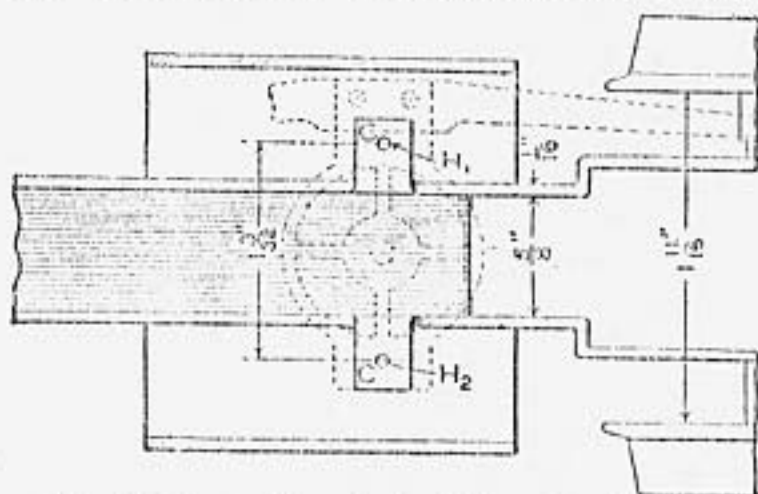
, View of the Under Side of the Motor, Showing How Switch is Fixed into Place
